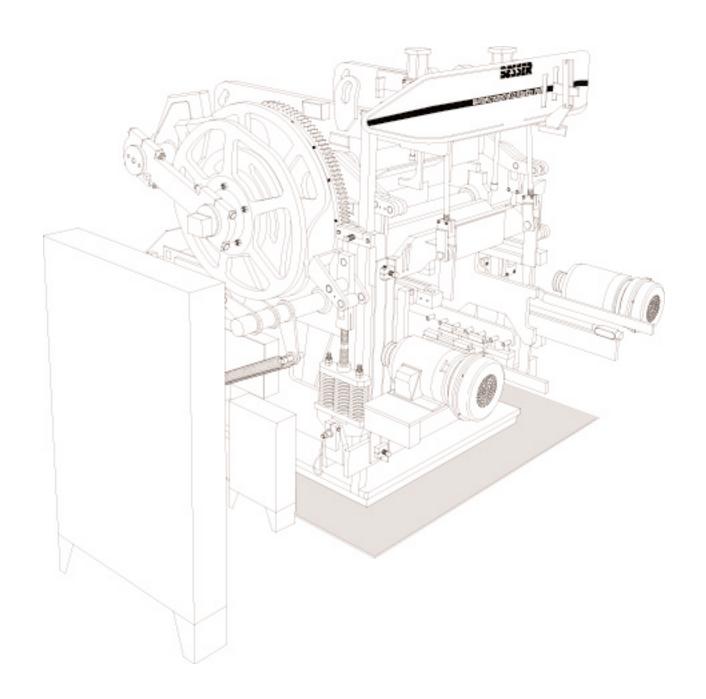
TYPICAL VIBRAPAC INSTALLATION.
